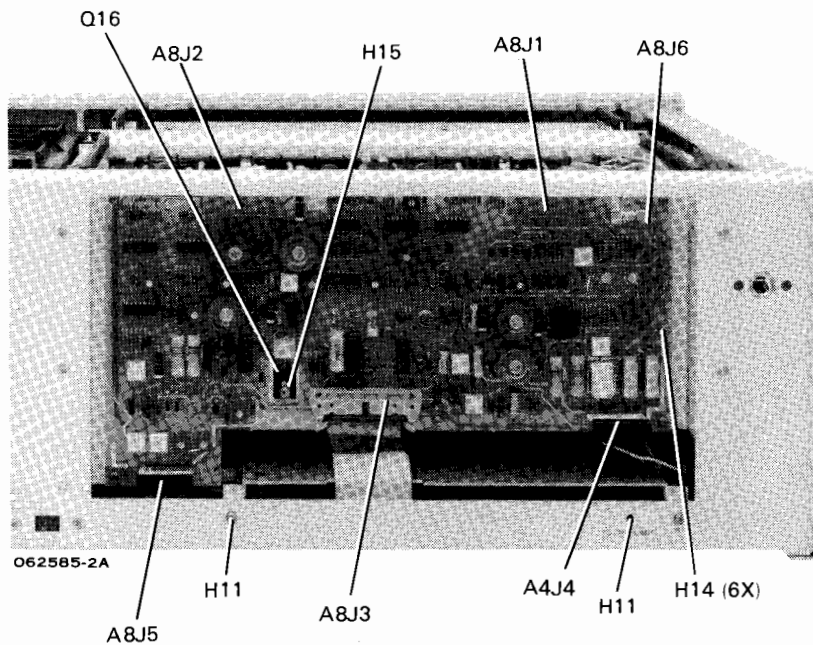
Z-Axis and High Voltage Assembly Removal
